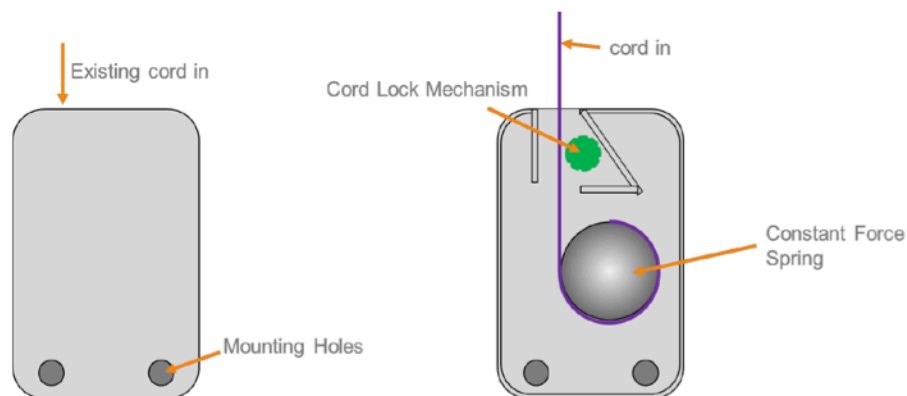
Mechanism 2 Design Pull Mounted Cord Reeling Accessory
